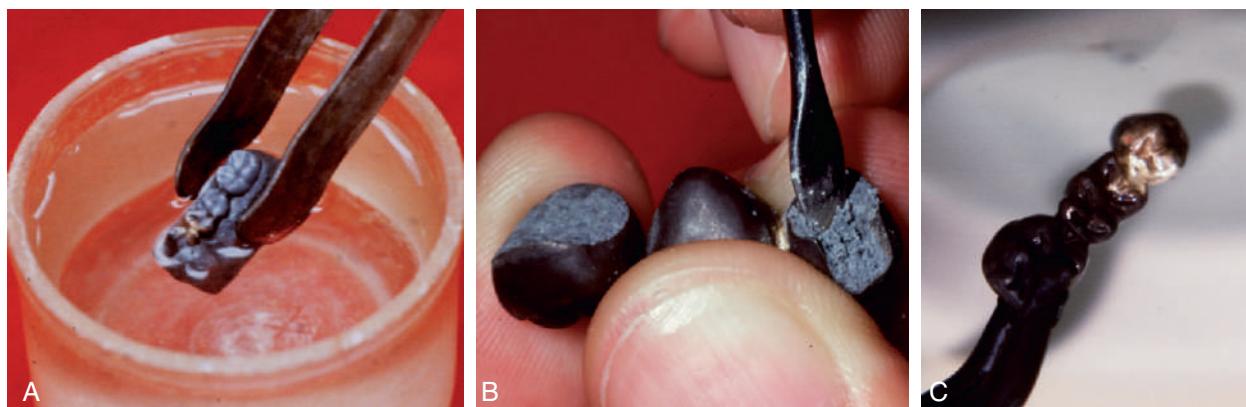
(A) After bench cooling for approximately 5 minutes, the assembly is quenched. (B) The investment is removed from the castings. (C) Surface oxides are dissolved in a pickling solution.
